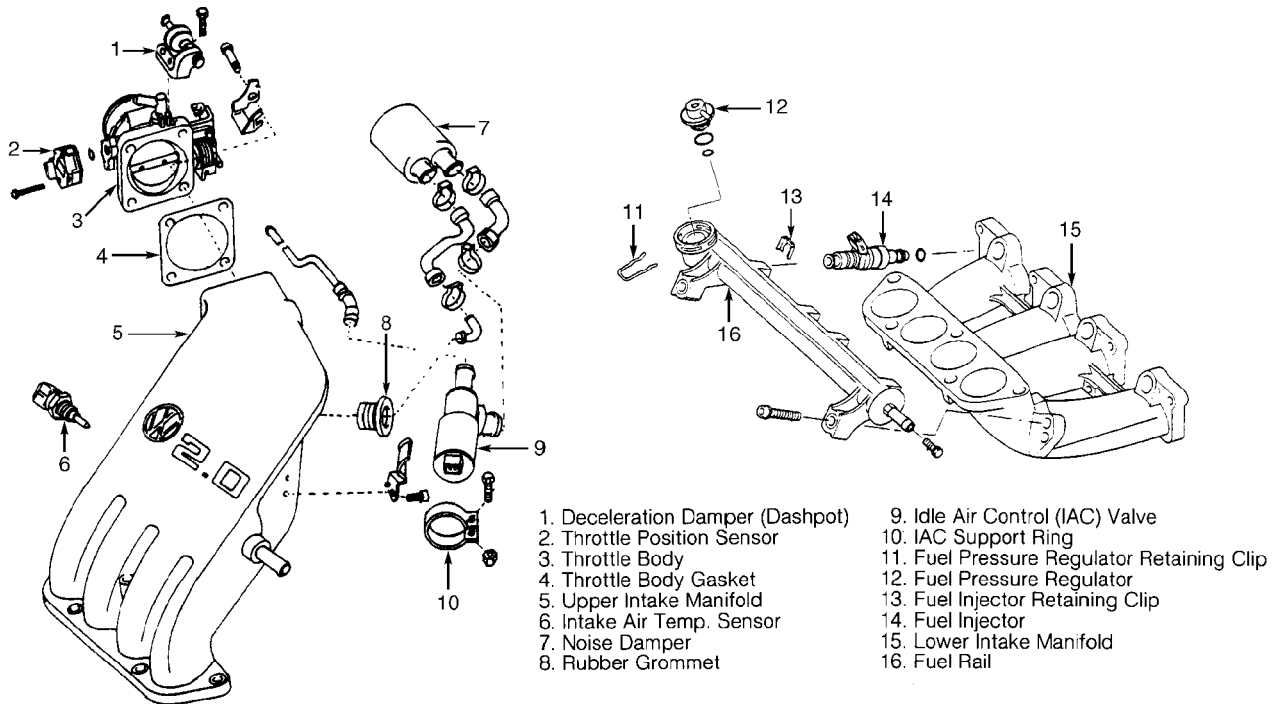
Exploded View Of Upper & Lower Intake Manifolds (2.0L)
